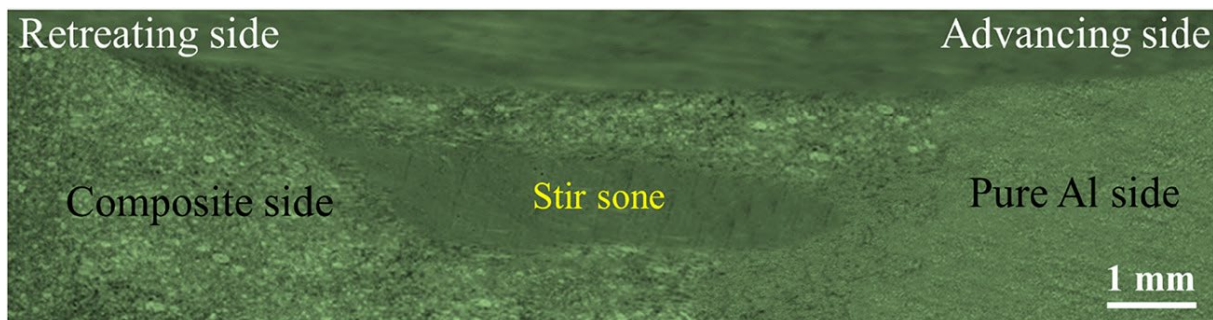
Typical cross-section of FSW welds of Al-4n6mAlumina at 1600 RPM, 32 mm/min.
